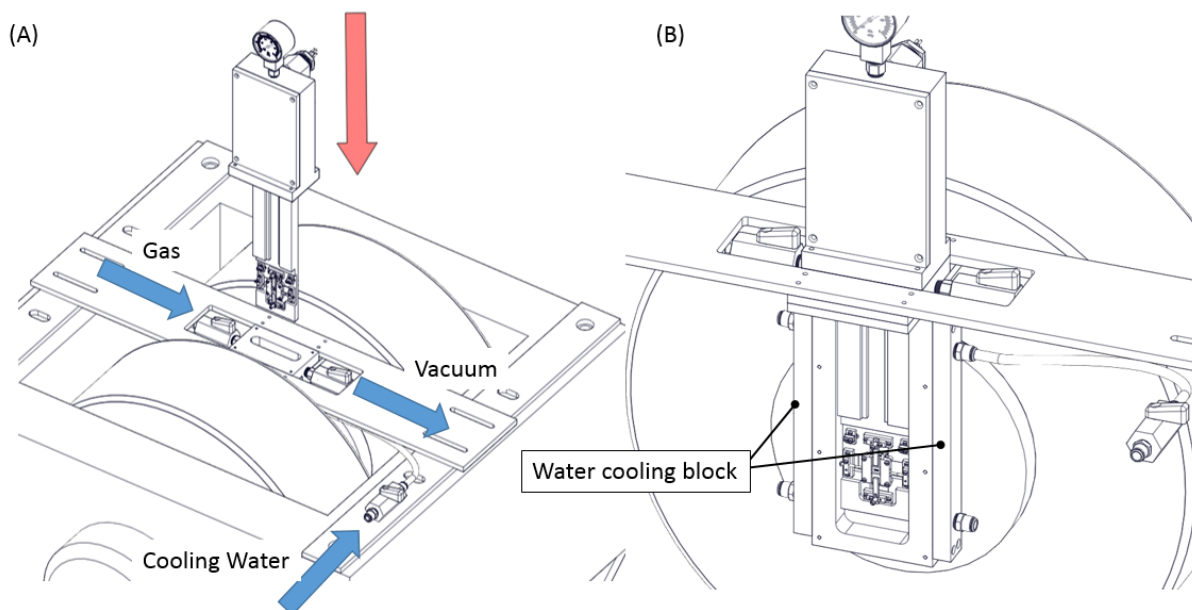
Environmental chamber design and the alignment-free plug-and-seal mechanism.
